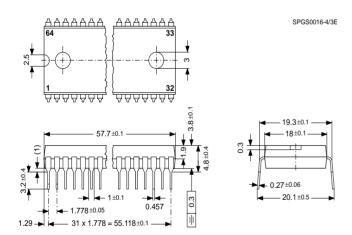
64-Pin Plastic Shrink Dual-Inline Package (PSDIP64) Weight approximately 9.0 g Dimensions in mm
